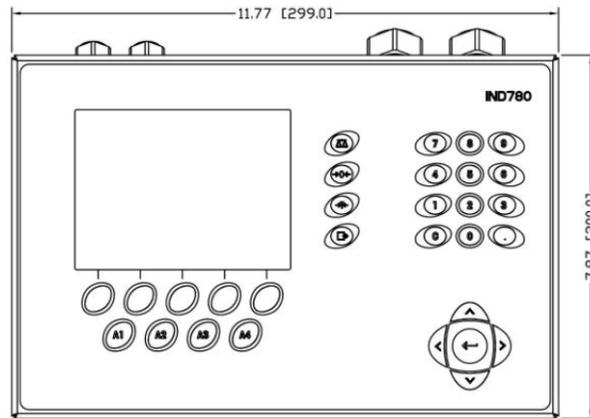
IND780batch Harsh Enclosure Terminal Dimensions, Front
